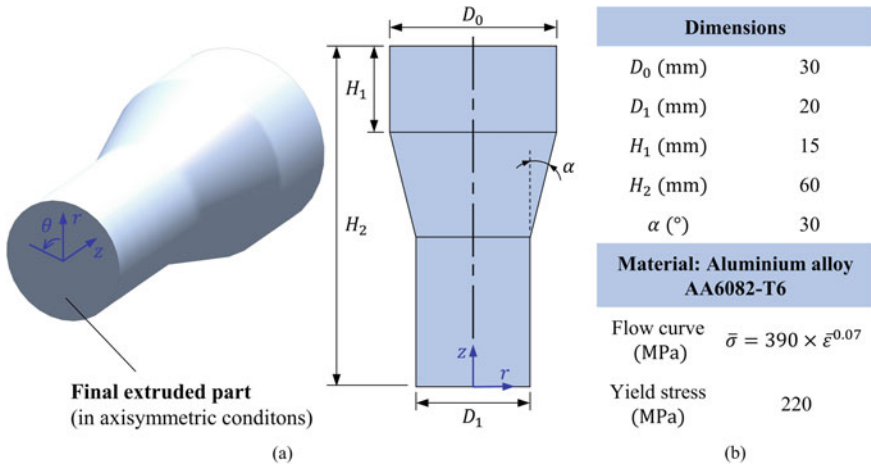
Example of a first section of a project assignment addressing a direct extrusion operation from an AA6082-T6 aluminium rod. a Geometry with added nomenclature of the final part and b Dimensions and material data
